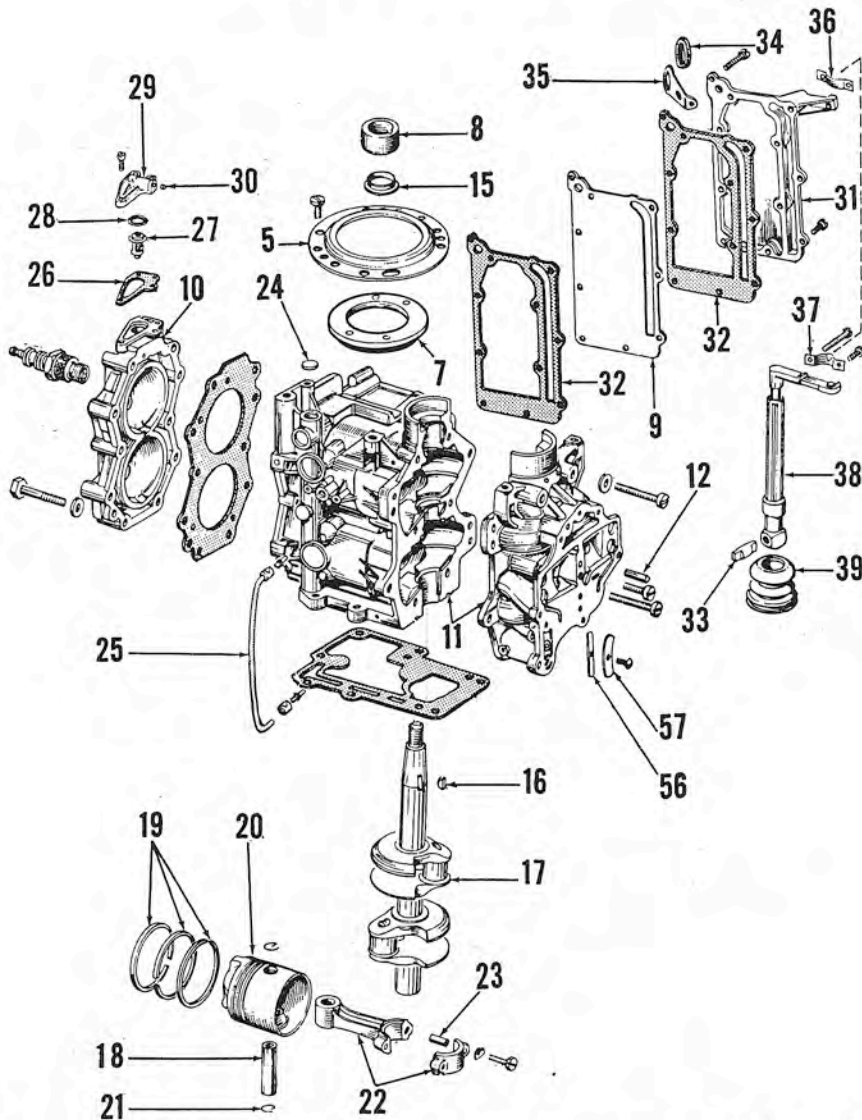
Exploded view of series CD power head, Coolant thermostat (26 through 30) is not used on motors before 1959.
